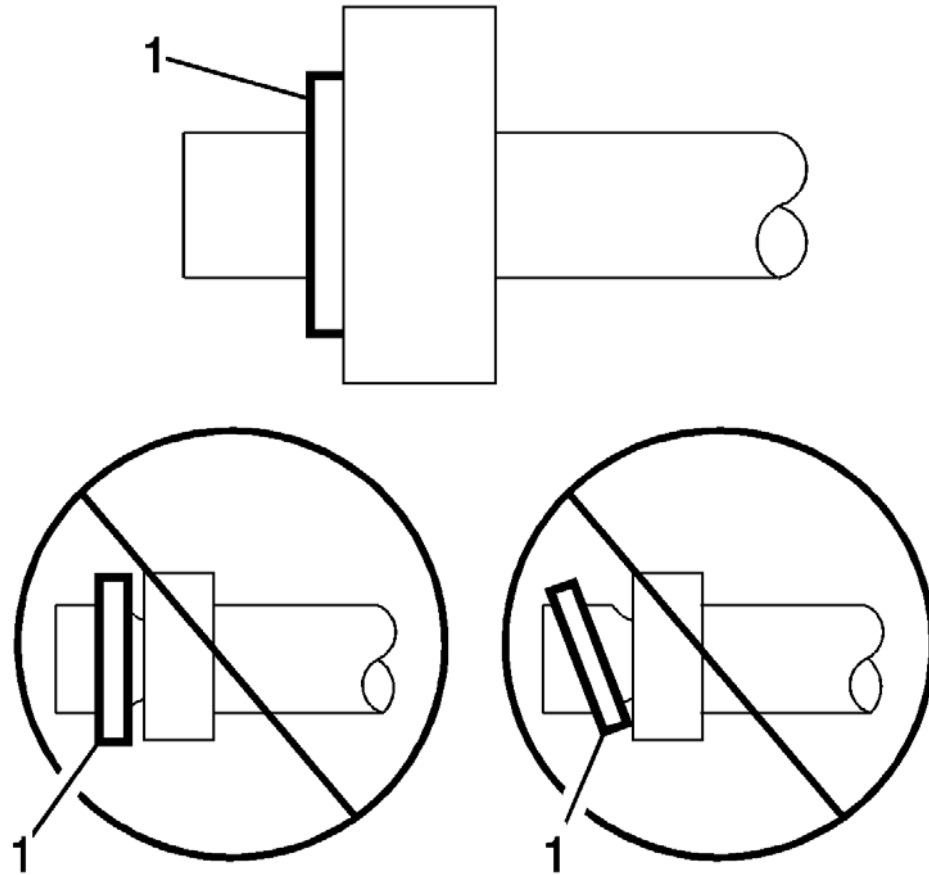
Proper Seating Of A/C Refrigerant O-Ring
